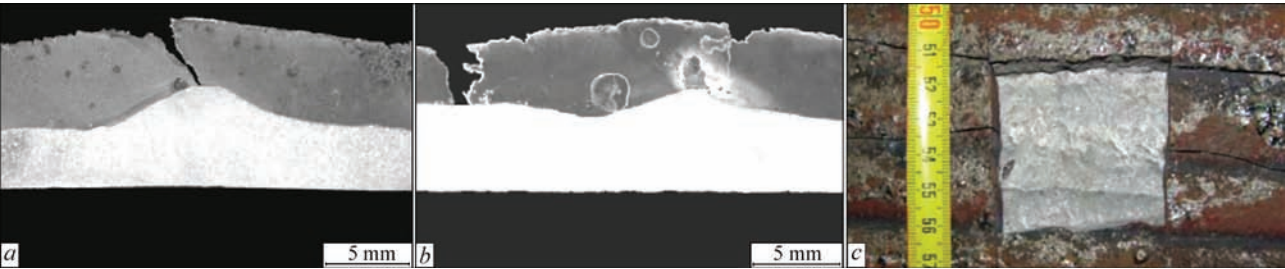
Cracks in HAZ metal (1023) of deposited layer (*a*) and the spalling (1023) of deposited layer (*b*) of steel 38Kh2MYuA
